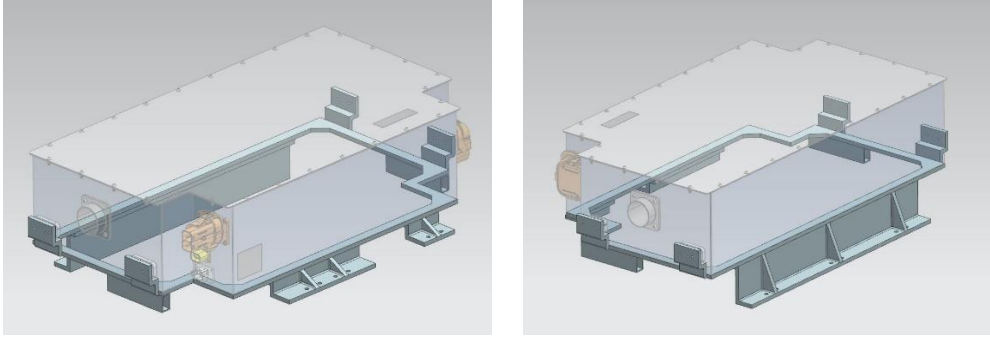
Battery Mount Isometric view - Front (Left) Rear (Right)
